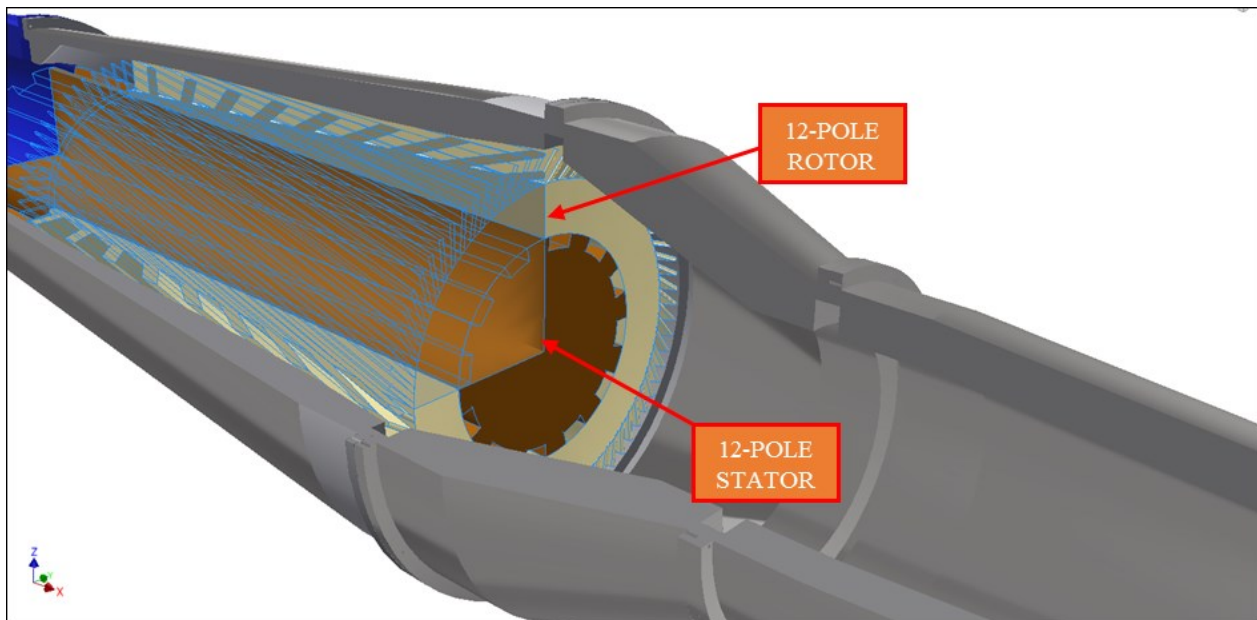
GARD C-Gen™ Module outlay with inlet and outlet sections (3)
